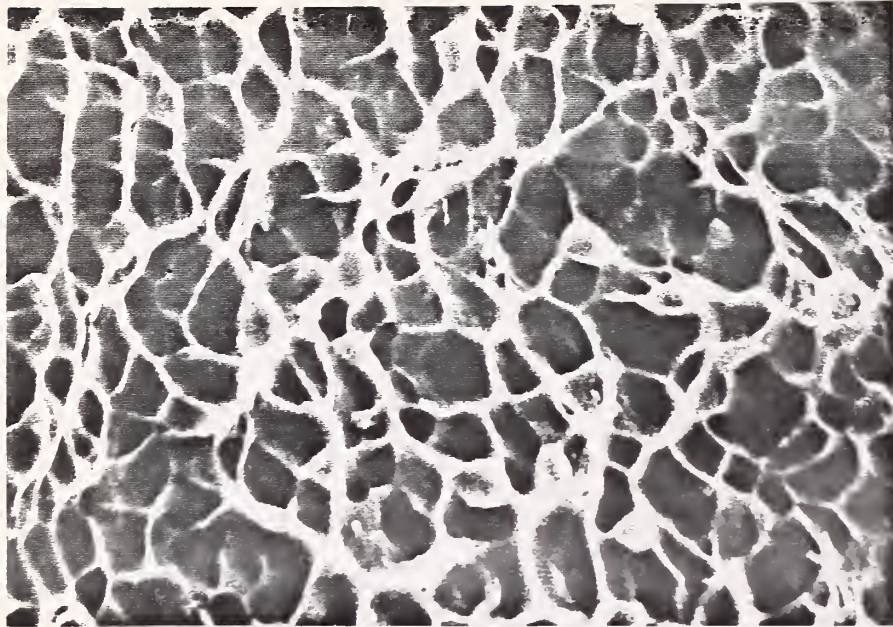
Fractograph of Charpy V-notch specimen, taken near the notch of weld 6. The ductile dimple density shown here is similar to those observed on tensile specimen fracture surfaces.
